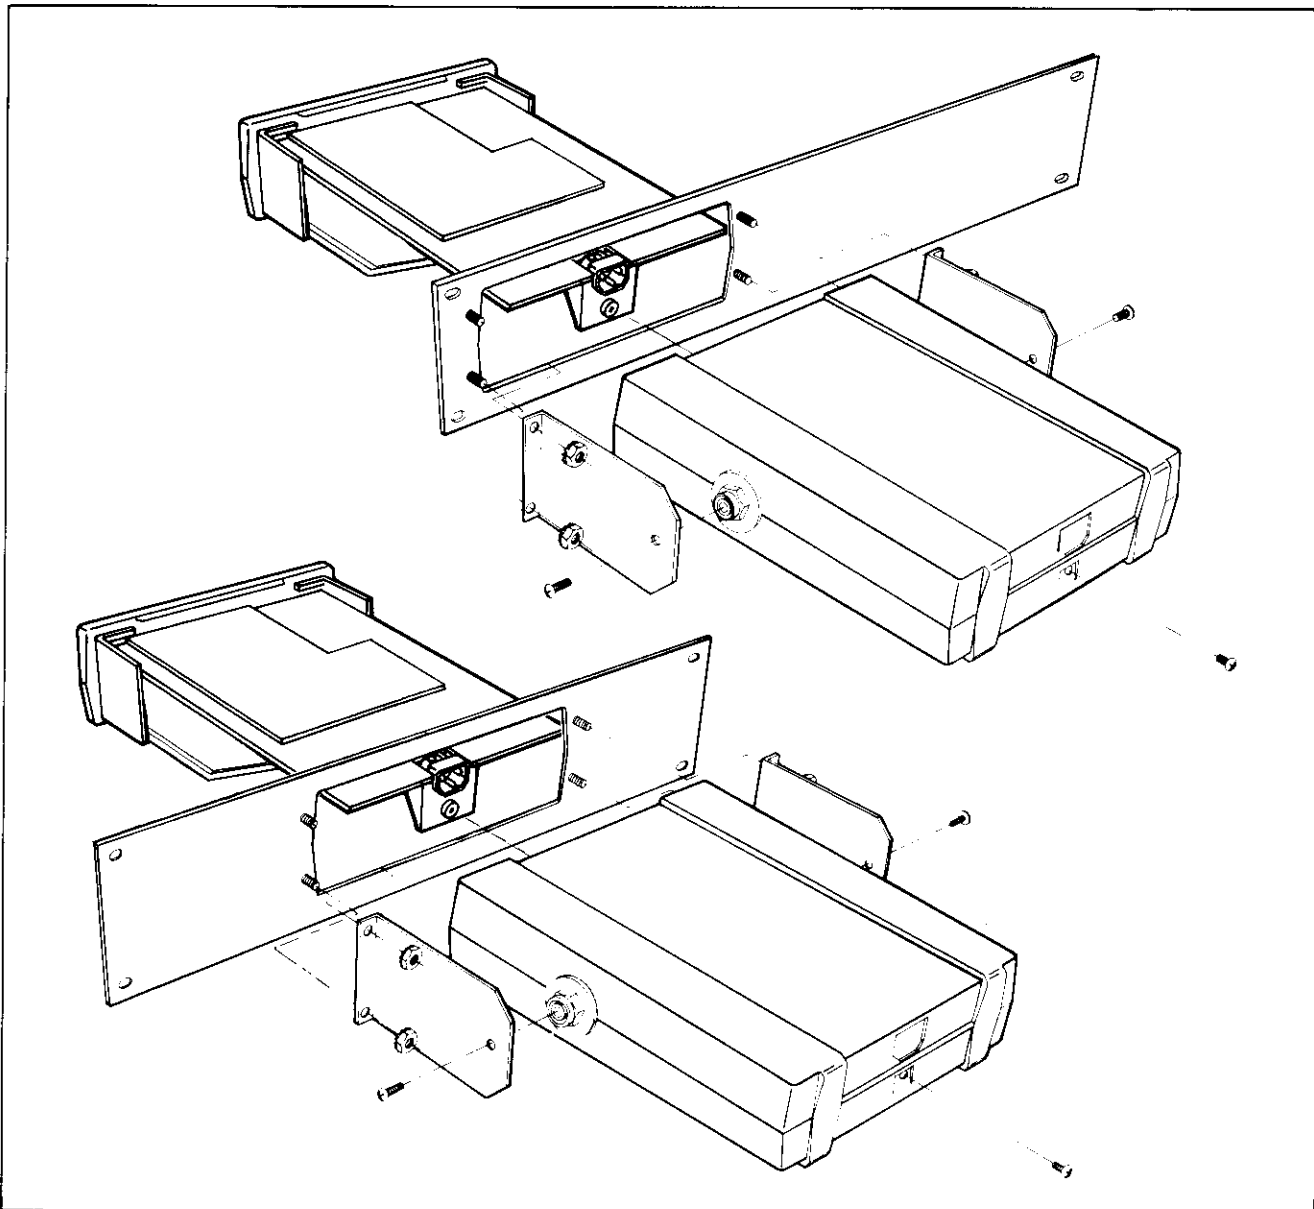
Rack Mounting Kits, Offset and Center Mounting
